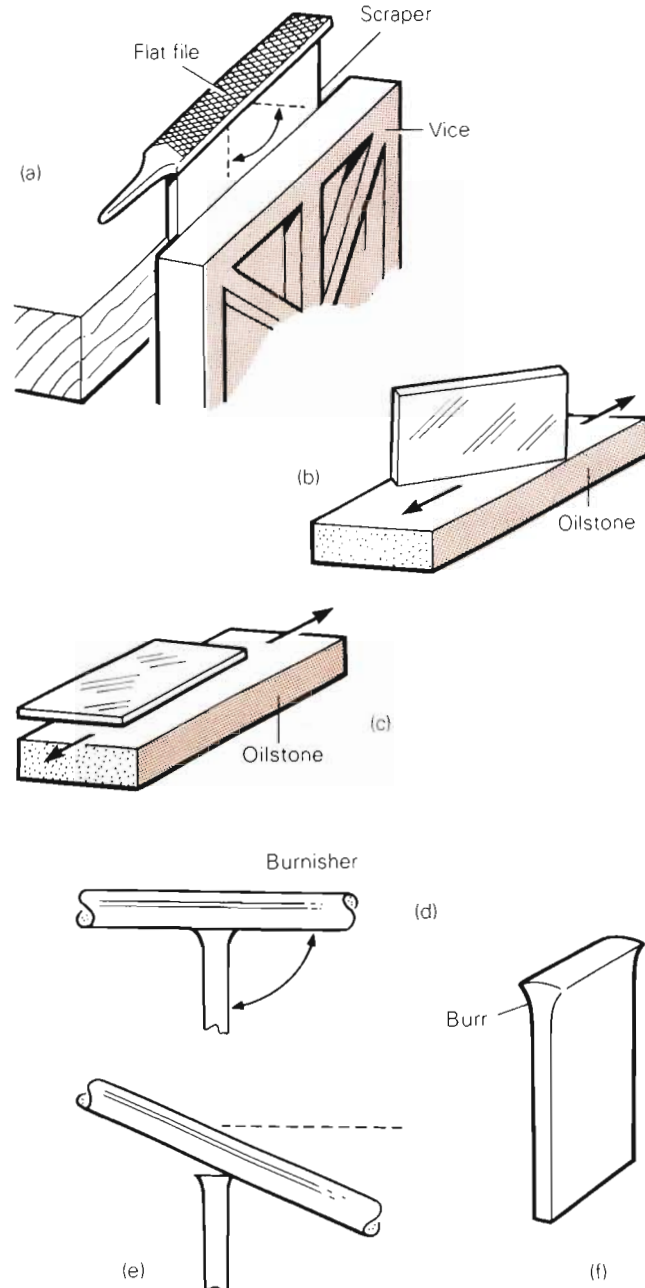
Sharpening a scraper: (a) filing the edge, (b) smoothing, (c) removing the burr, (d) flattening the edge, (e) turning the edge over, (f) final shape.
